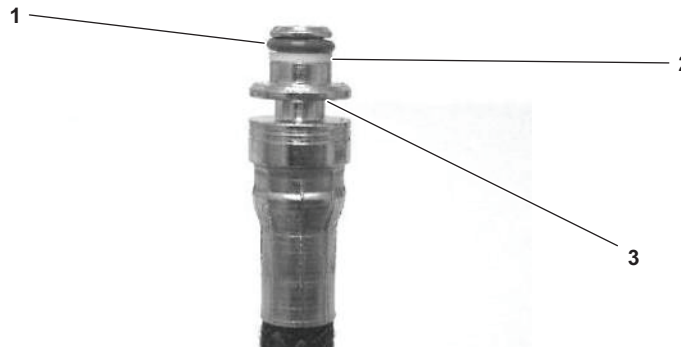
RIC/UAC Assembly Preformed Packing and Packing Retainer
